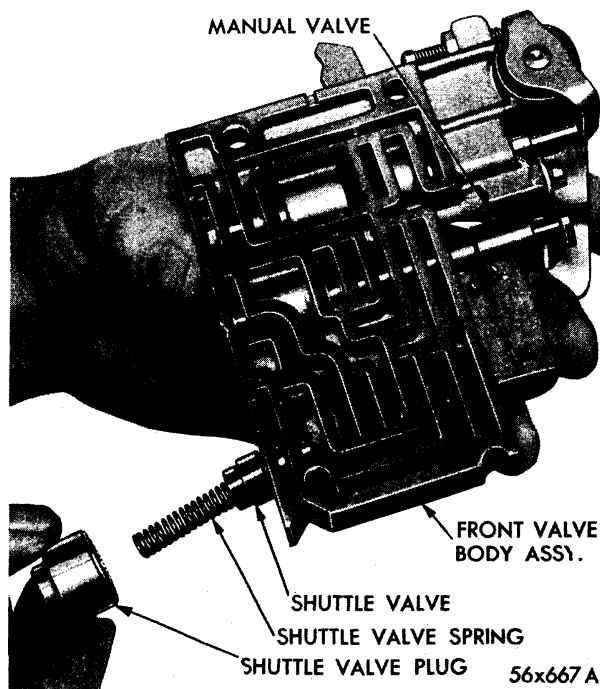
Removal and Installation of Shuttle Valve, Plug, Spring and Valve
